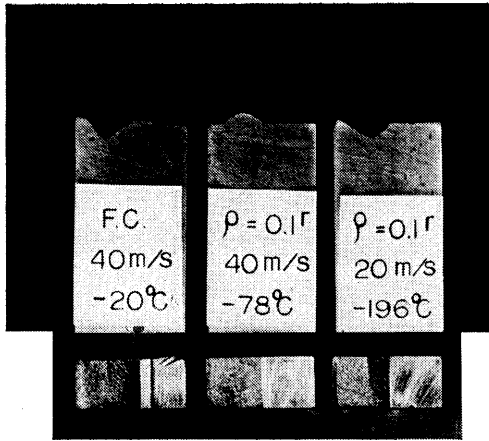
Macroscopic fracture appearances of fatigue-cracked and notched specimen presumed from impact force.
